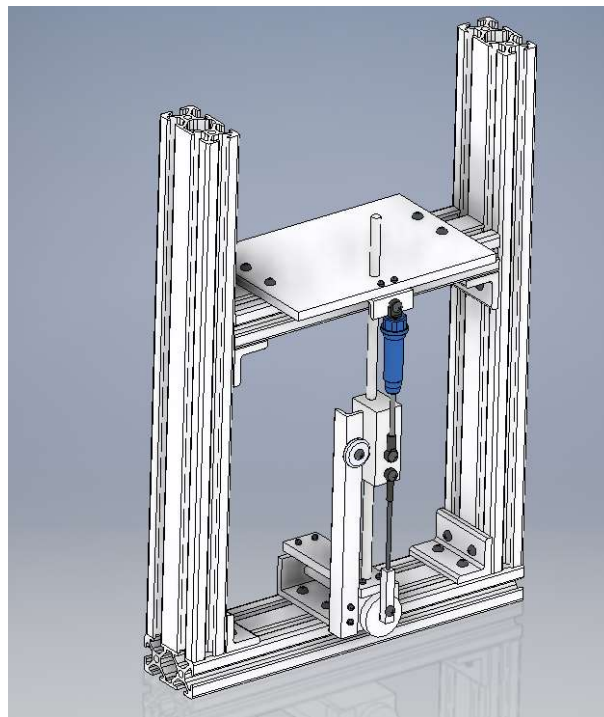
The Shock Dyno with a damper mounted, as technical drawing.
